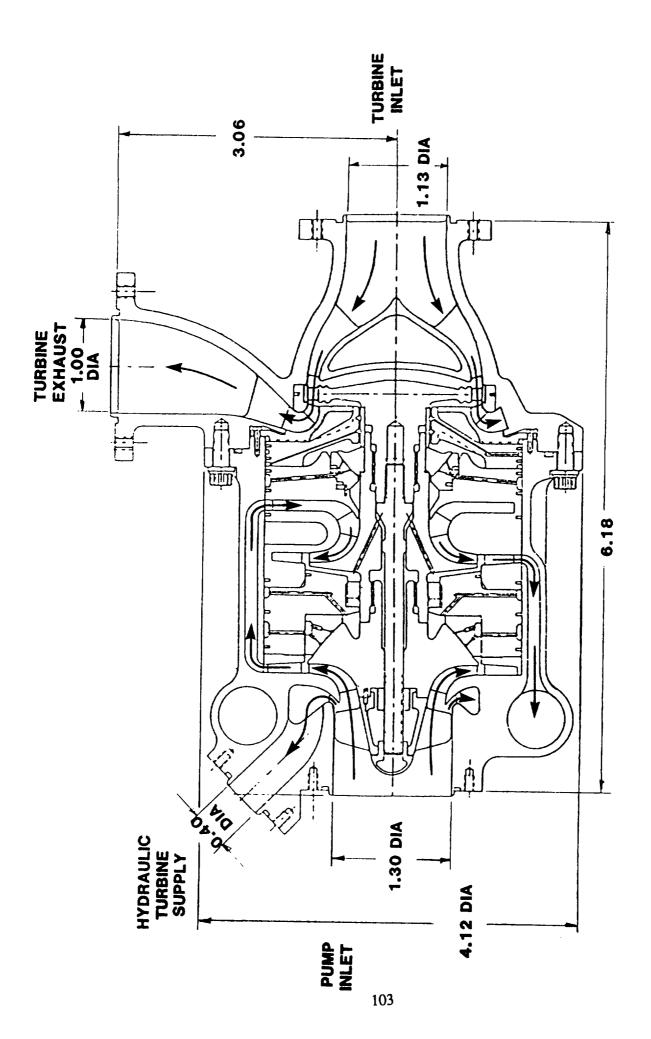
Preliminary Design OTV, 7500 Pound Thrust Engine, High Pressure Oxidizer Turbopump
